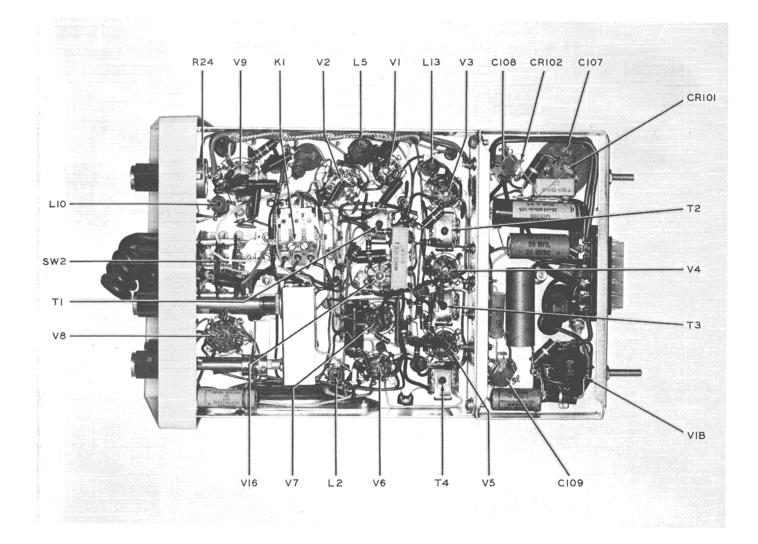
Model G-15 Citizen's Communicator, Bottom Chassis View
